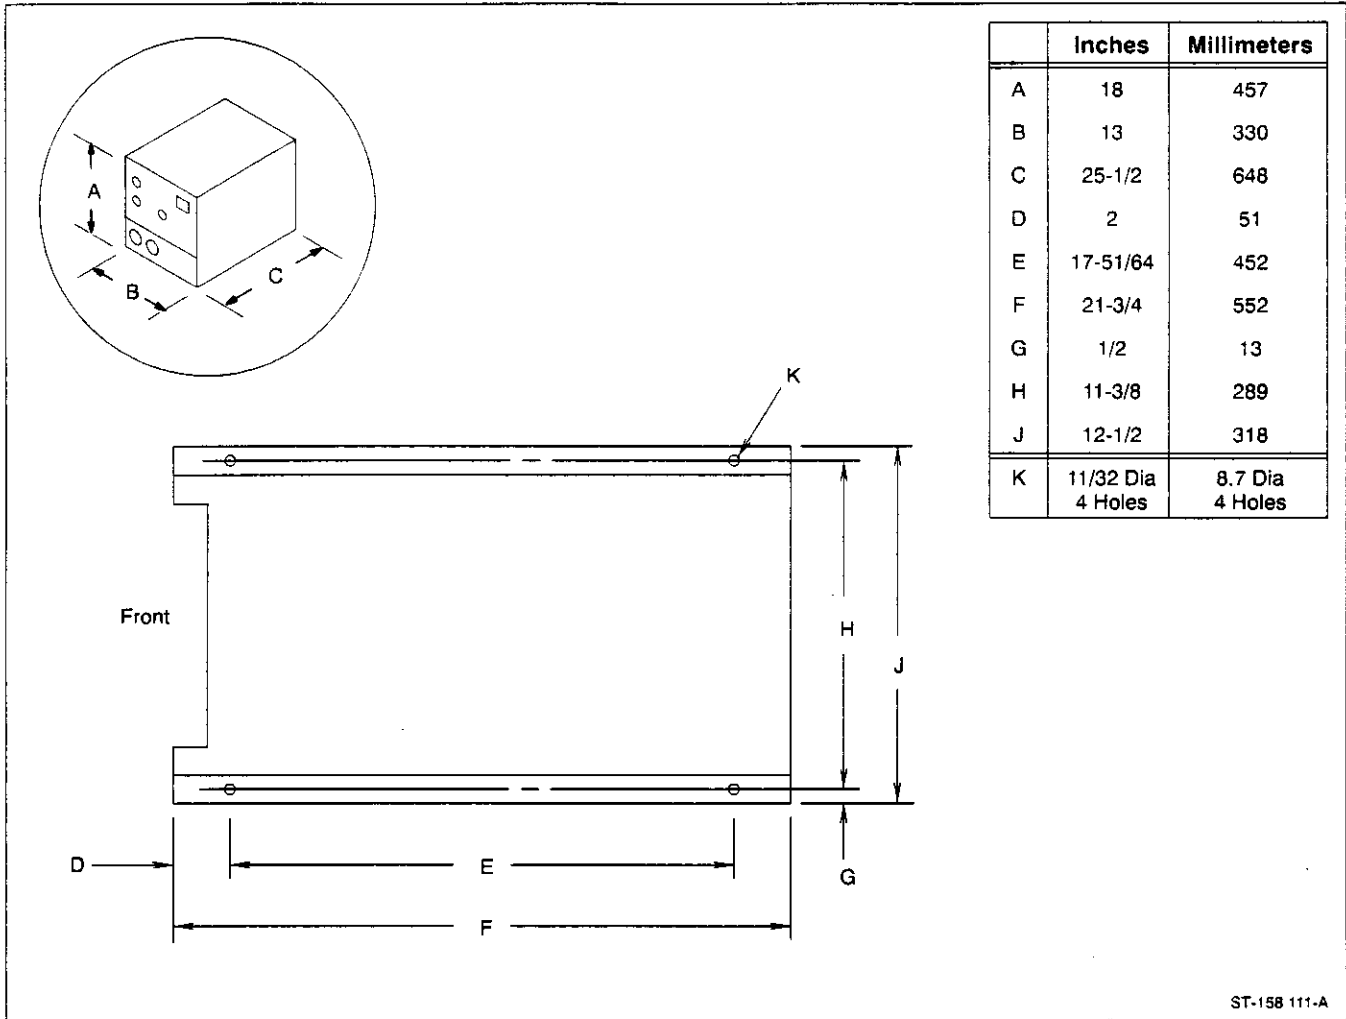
Overall Dimensions And Base Mounting Hole Layout
